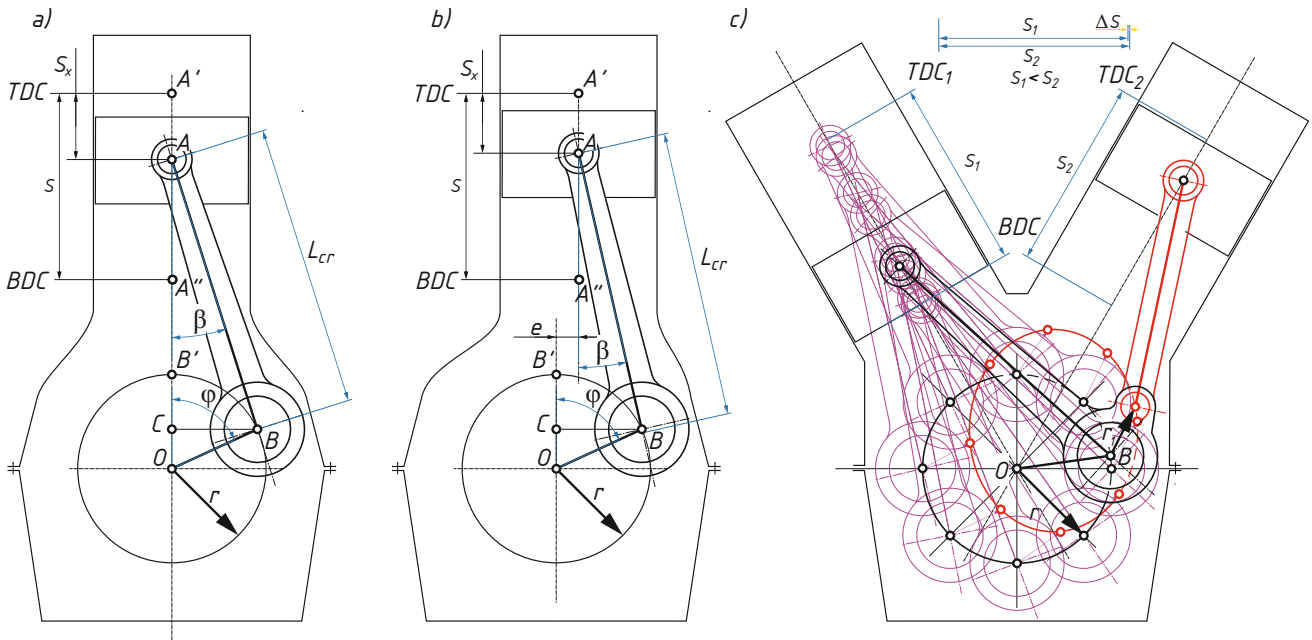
Diagrams of crank mechanisms of internal combustion engines; a – central; b – displaced (disaxial); c – with trailed connecting rod
